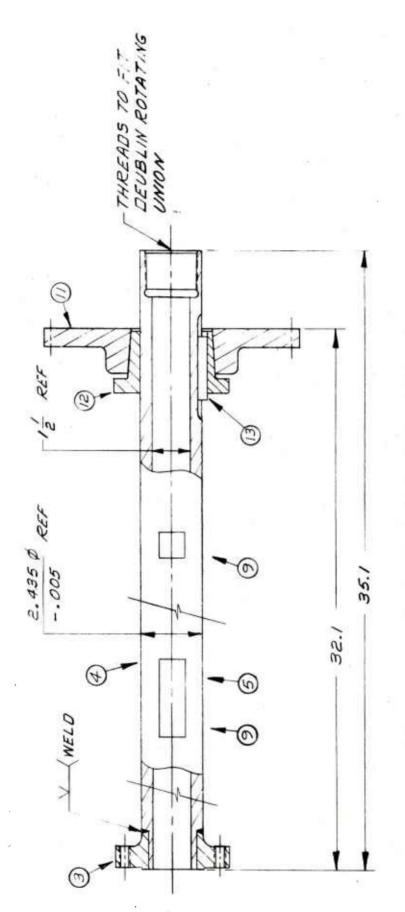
MANDREL SHAFT ASSEMBLY DESIGN
